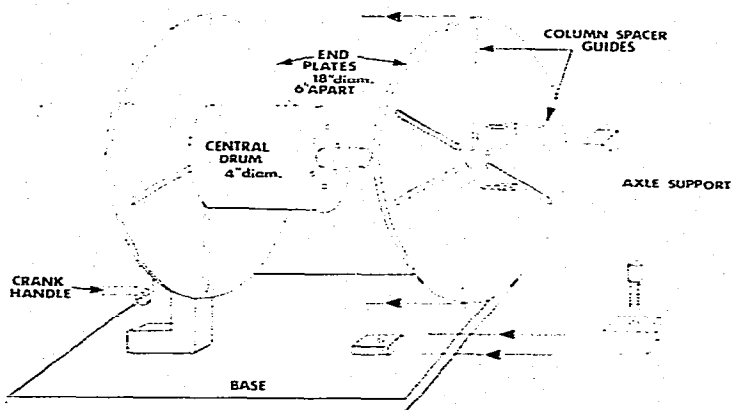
The knock-apart winding drum. All parts are aluminum, brass or wood.
